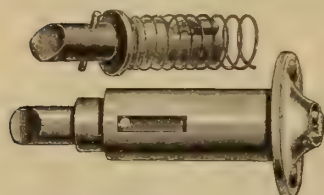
SEAT ARM RIVETS. D. M. Co.
